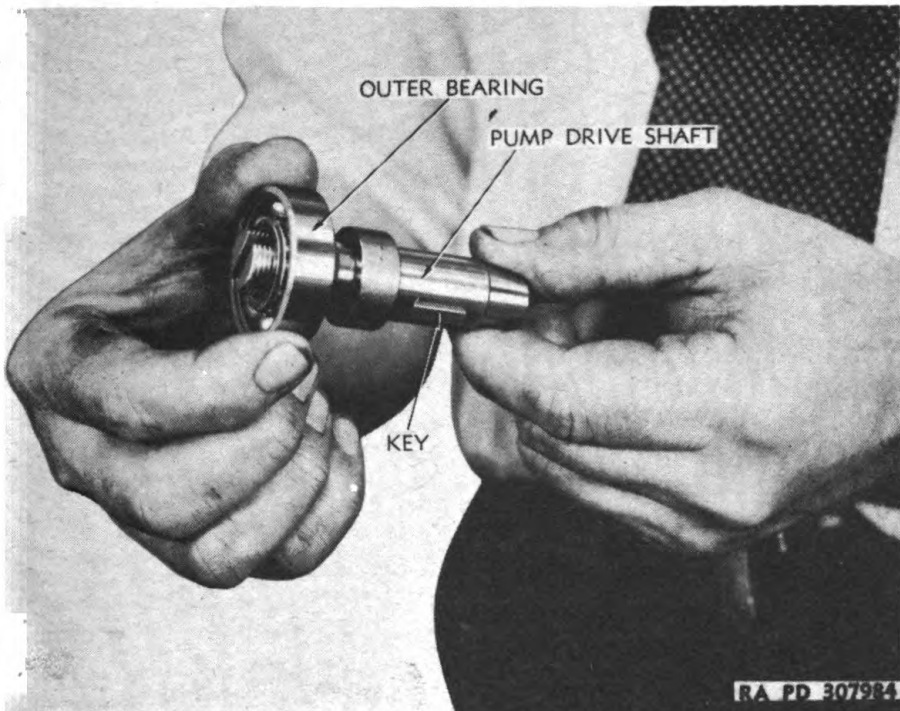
Installing Outer Bearing on Pump Drive Shaft
